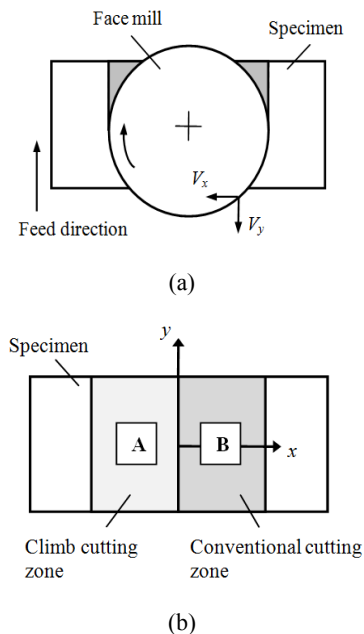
(a): Upper view of the tool-sample system and; (b): cutting zones introduced
